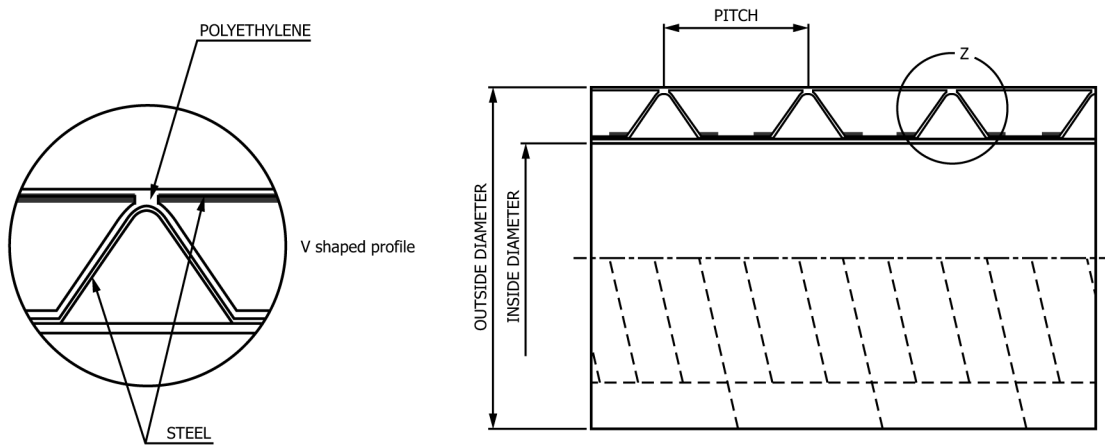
Triple-Wall Steel Reinforced Corrugated Polyethylene Pipe – Type IIA
